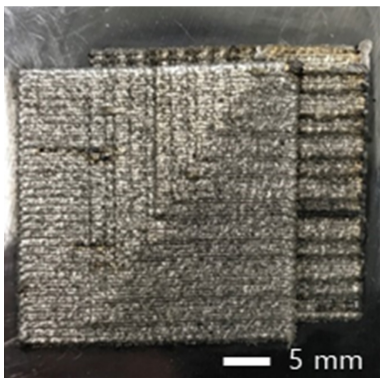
Auto-surface tracking deposition results of step surfaces using PSD type SOD measurement module
